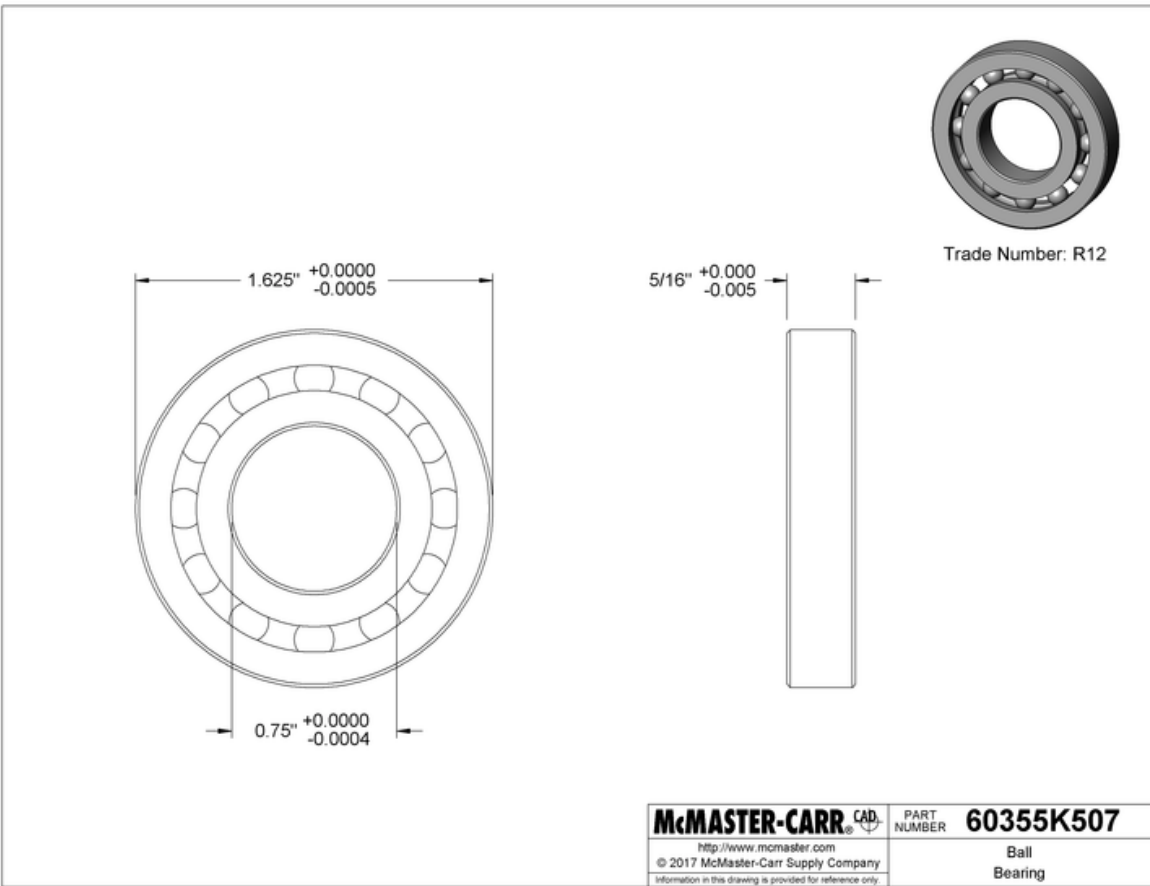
0.75-Inch Shaft Diameter Ball Bearing Engineering Drawing [28]
